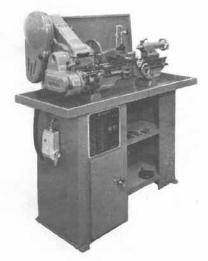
Lathe mounted on Industrial Cabinet Stand with built-in coolant service and splash guard.
